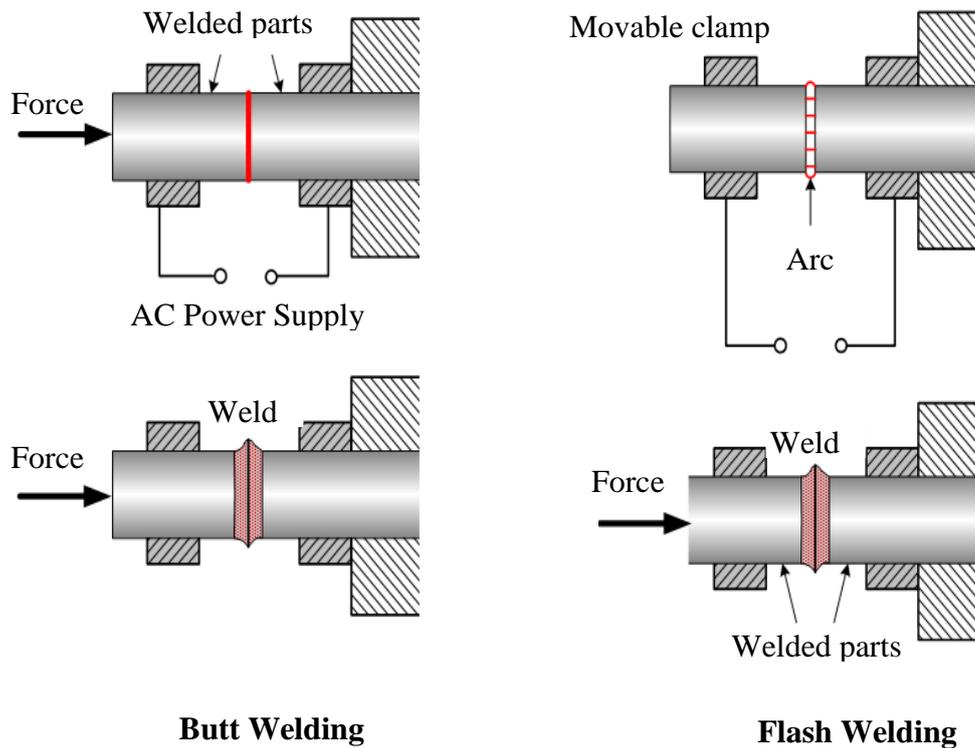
Resistance Butt welding and Flash welding [34]
